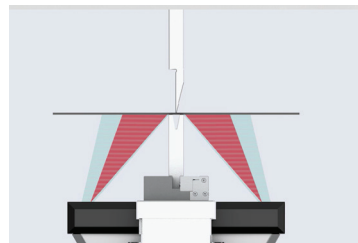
B.7 : laser projects a line on the workpiece surface; camera system detects this line
